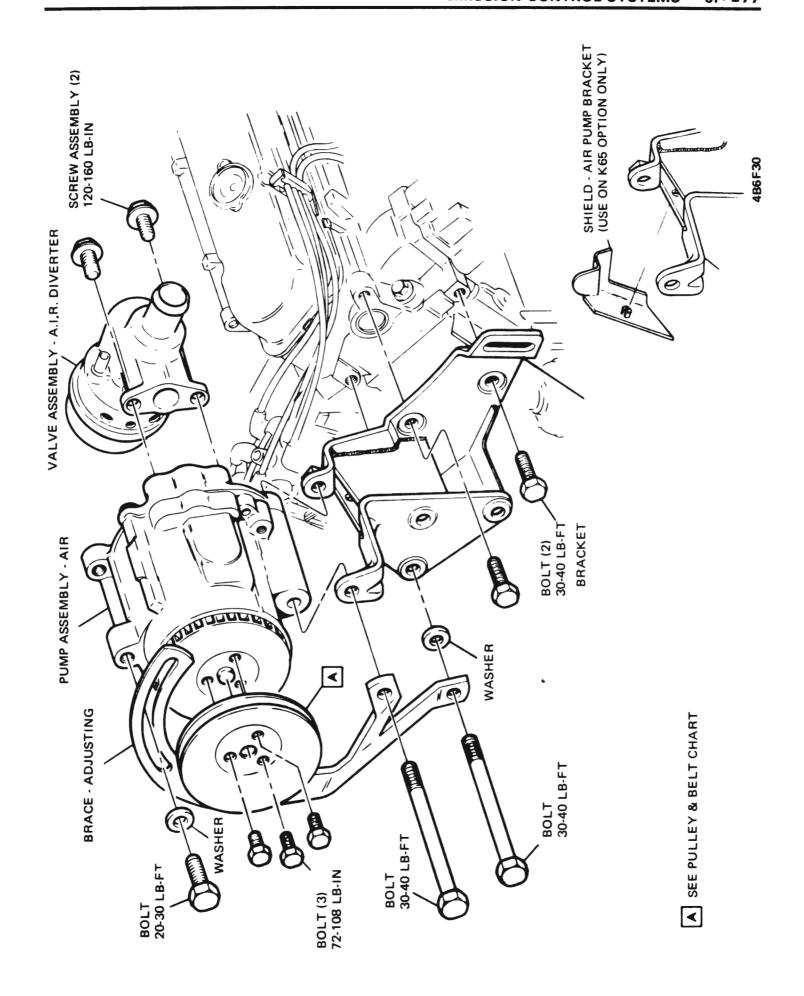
F-30 All Series A.I.R. Pump Mounting (V-8 Engines)
